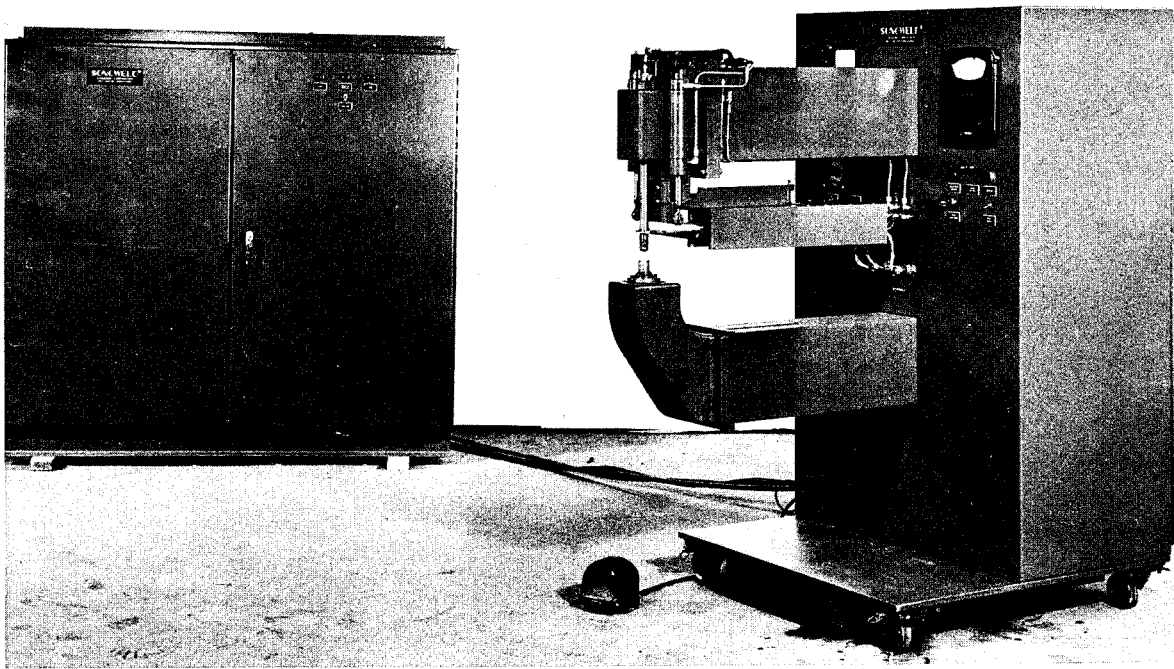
Ultrasonic welding equipment, Model W-4000—FSR, 400-watt; Sonobond Corp.
